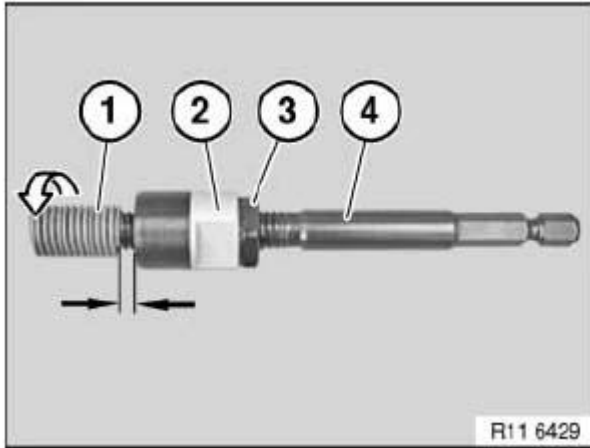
Identifying Spacer, Lock Nut, Helicoil-Plus And Helicoil
